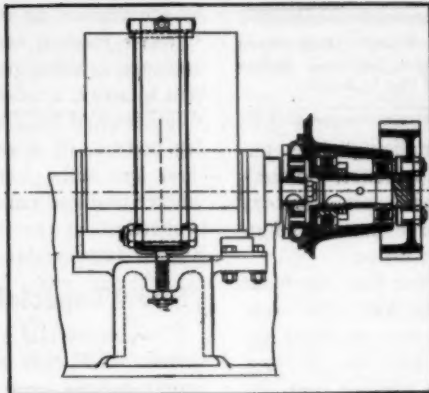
Section of the driving means for the magneto, utilizing annular type ball bearings and an integral gear universal joint
